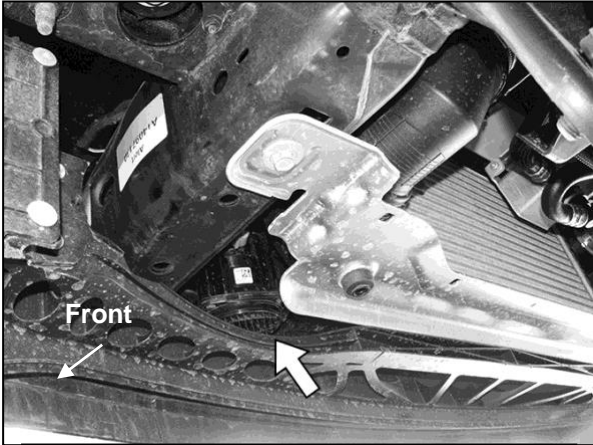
Remove bolts (arrows) to remove active air dam from motors (passenger/right side pictured)
